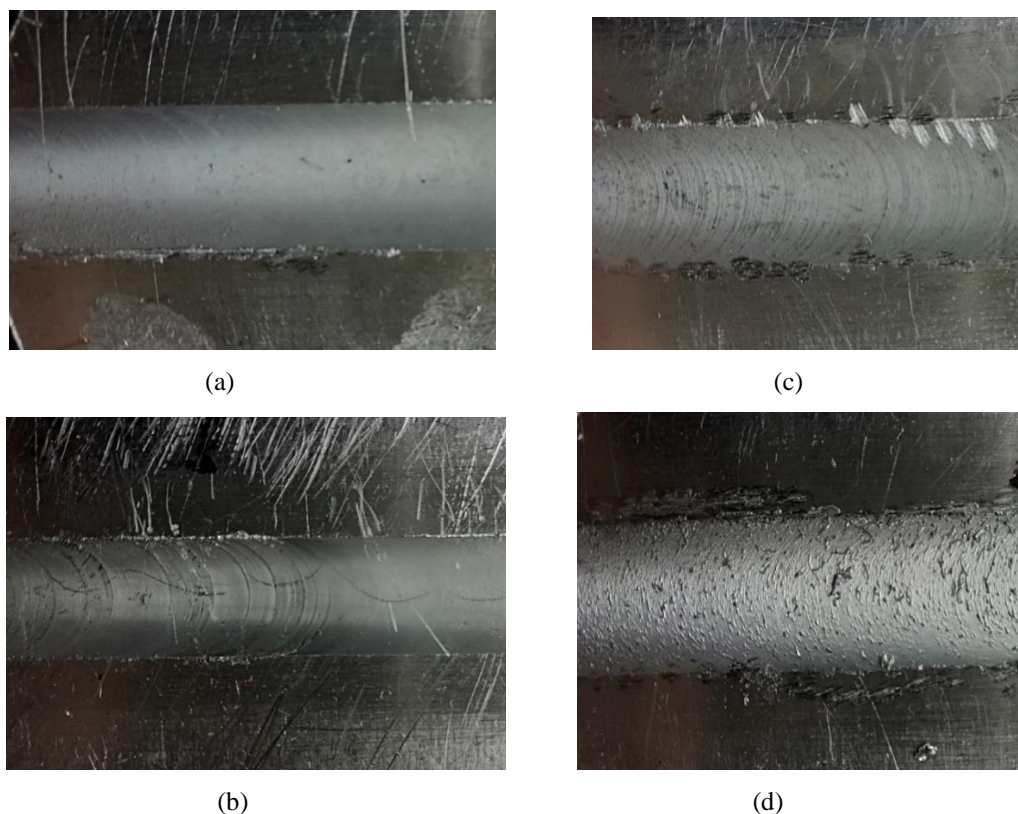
FSW welded plates at various process parameters (a) 1400 rpm, 40mm/min (b) 1400 rpm,30 mm/min (c) 1500 rpm ,40 mm/min (d) 1300 rpm ,50 mm/min
